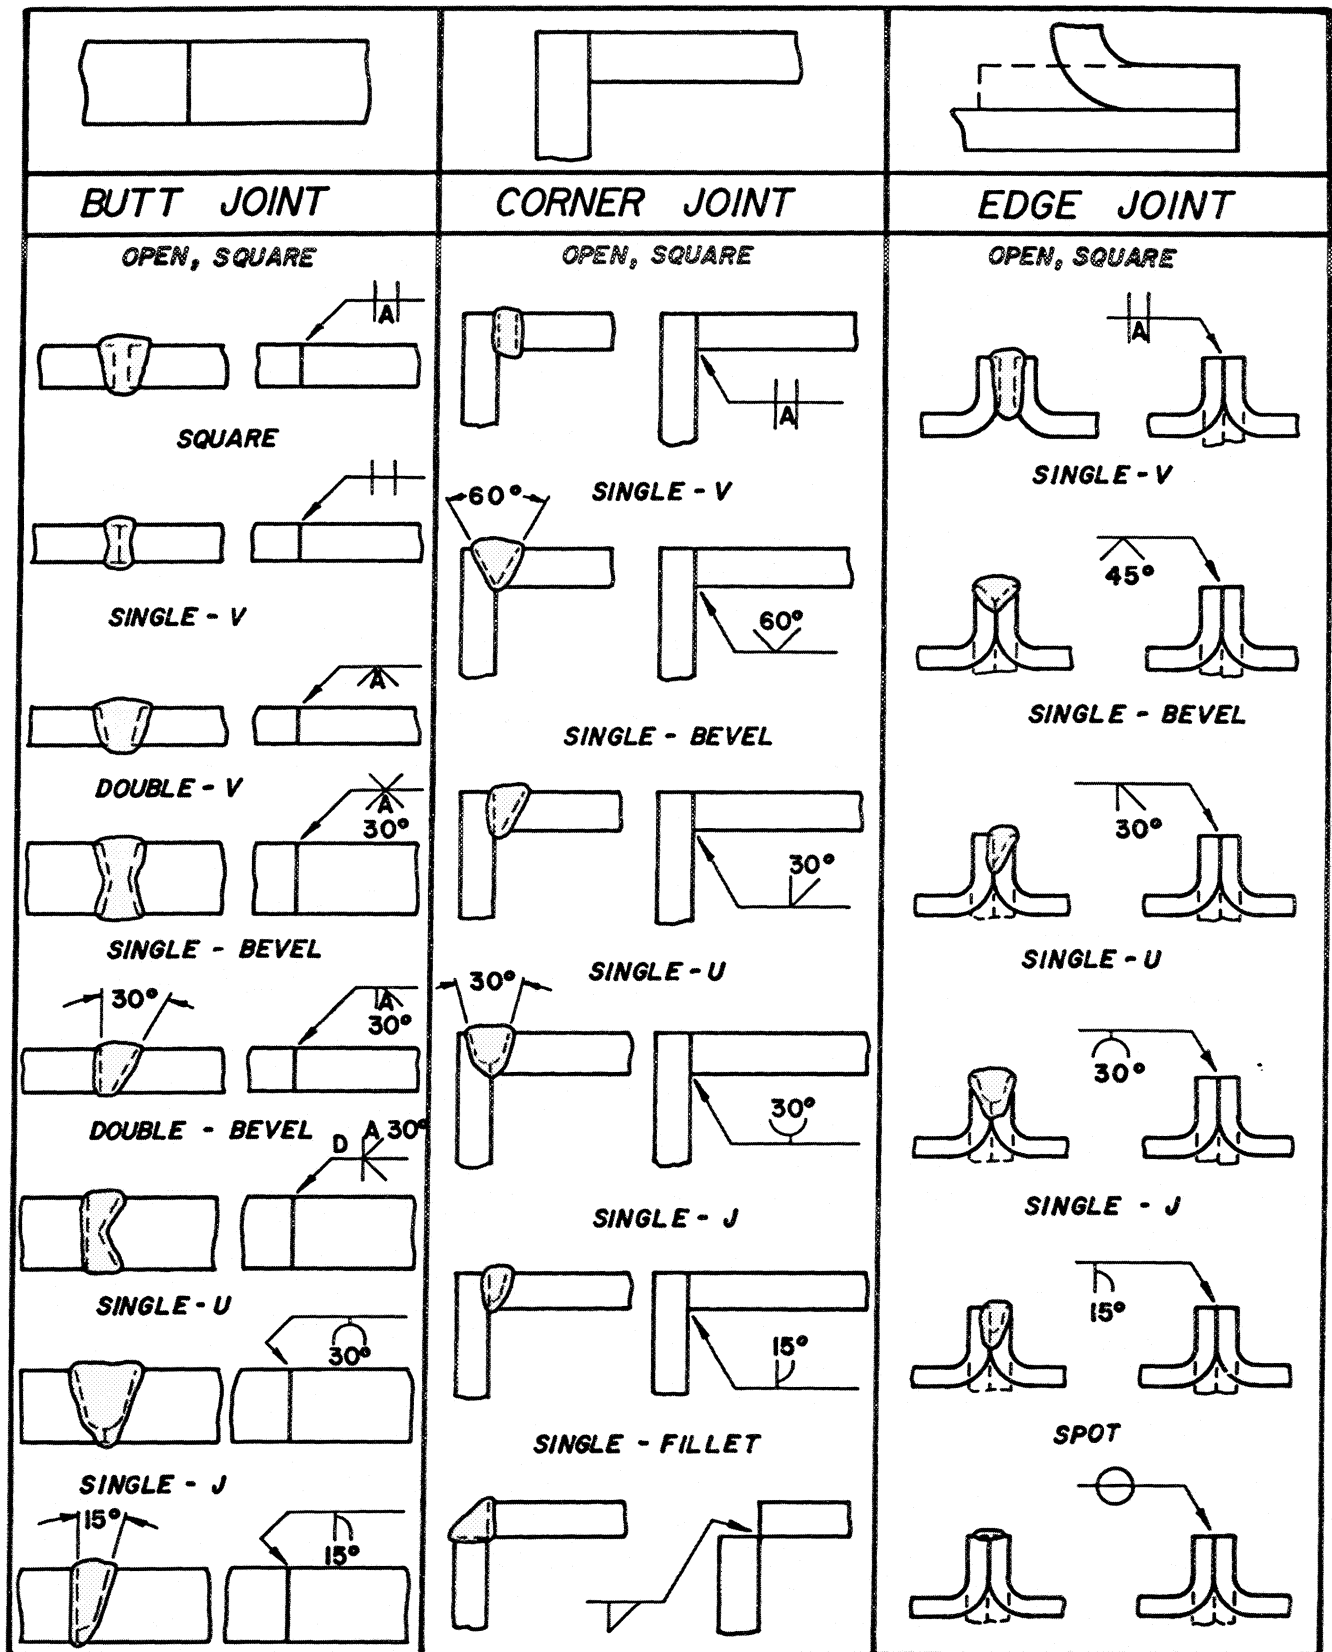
Joints and Appropriate Welds—Continues
